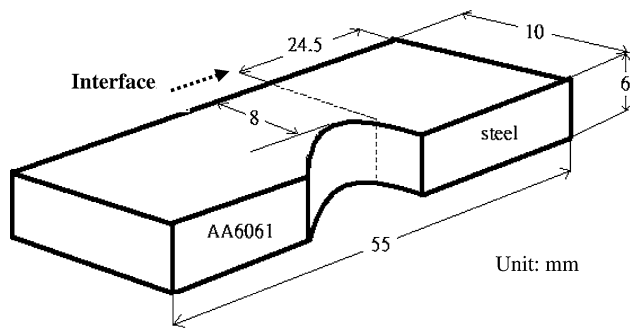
C-notch impact specimens dimension along the vertical direction of the welding line
